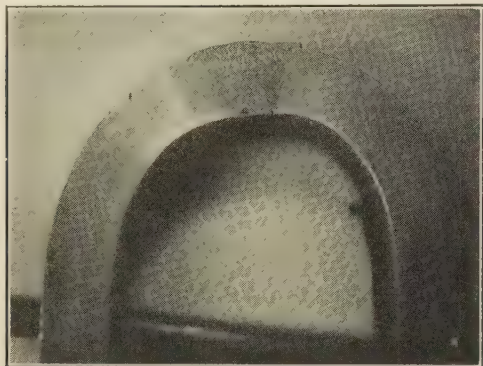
DEEPLY ETCHED SECTION OF MULTIPLE ARC WELDED  $\frac{1}{2}$ -IN. PLATE
